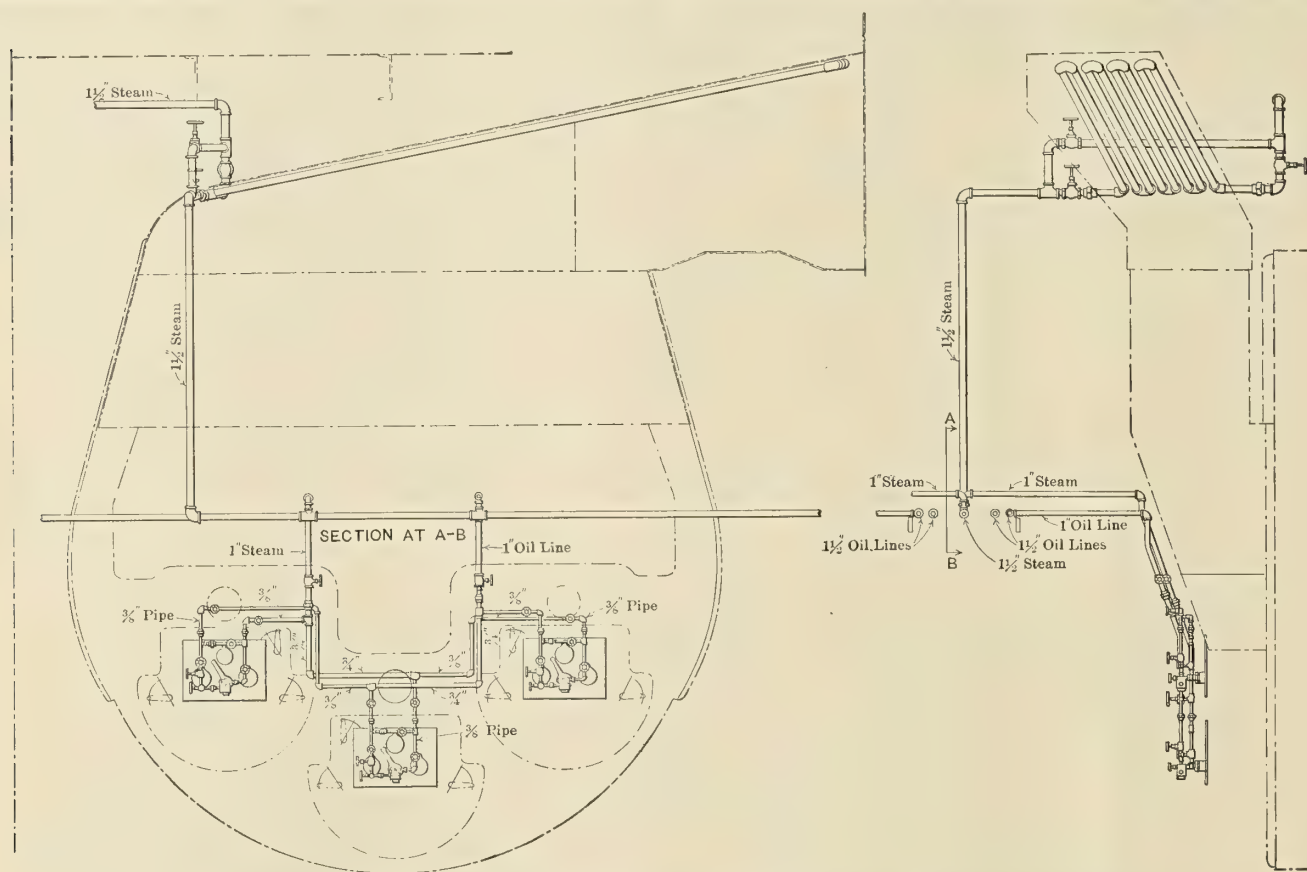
ARRANGEMENT OF PIPING, BURNERS AND SUPERHEATERS ON BOILERS OF THE HARVARD AND YALE.
